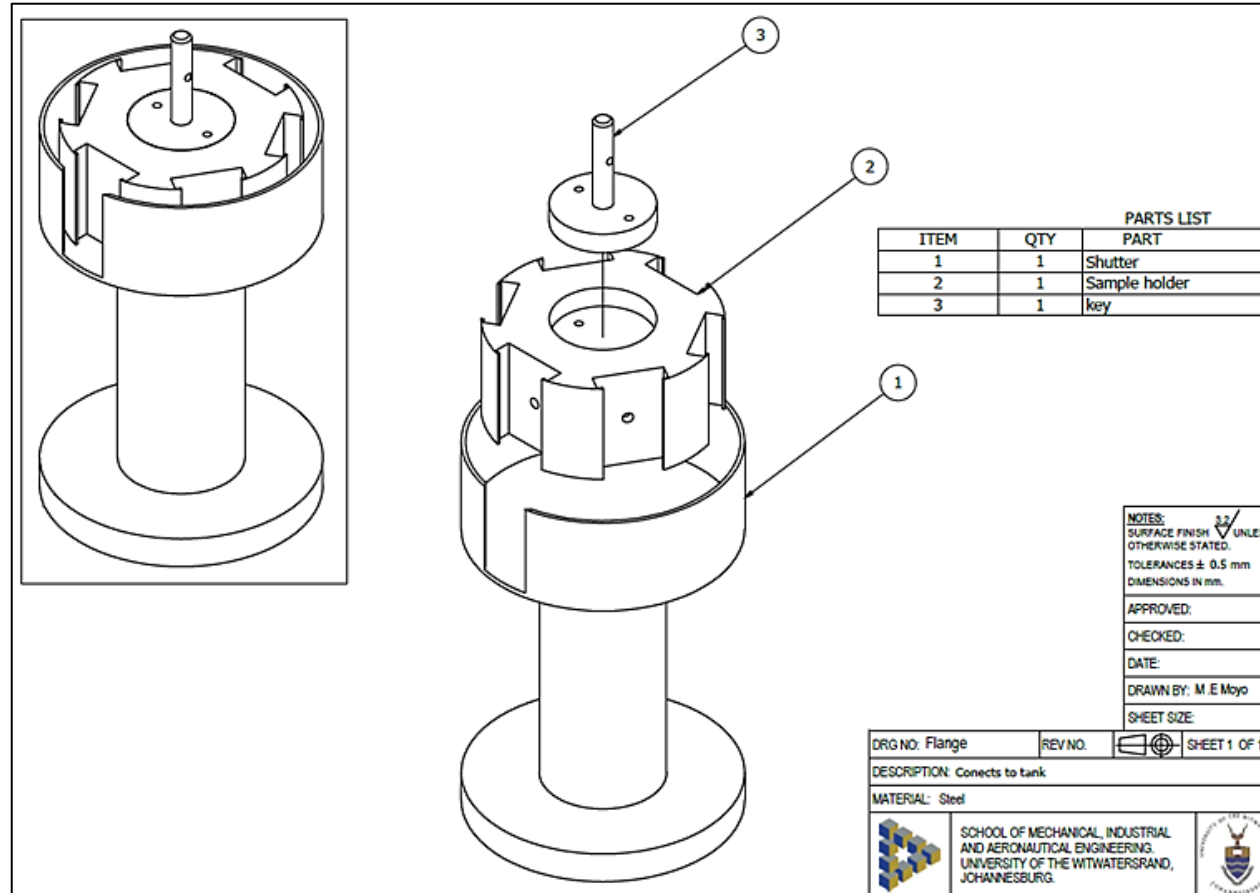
Assembled and exploded views of the sample holder used in RF sputtering.
